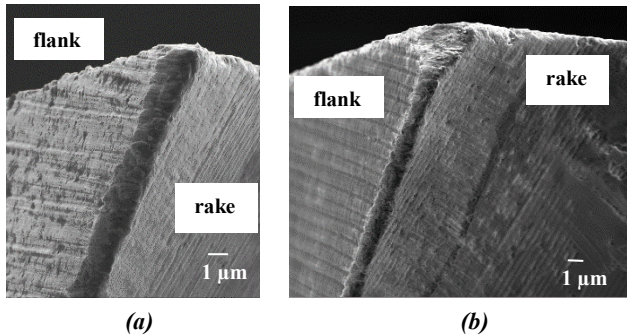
Optical images of a zirconia coated micro end mill (a) before machining and (b) after machining for 50 mm.
